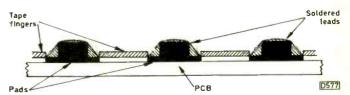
Cross-sectional view after the application of heat, showing how the solder amalgamates with the PCB pads while the tape fingers leave the areas in between clear.
